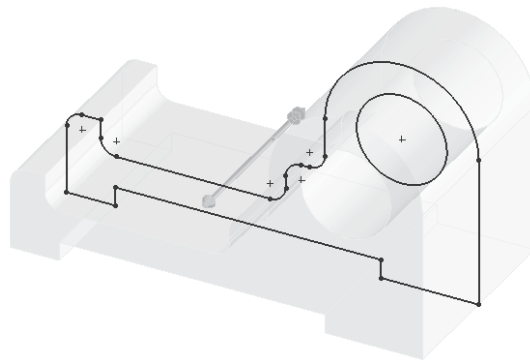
Preview of the feature being extruded by dynamically dragging
